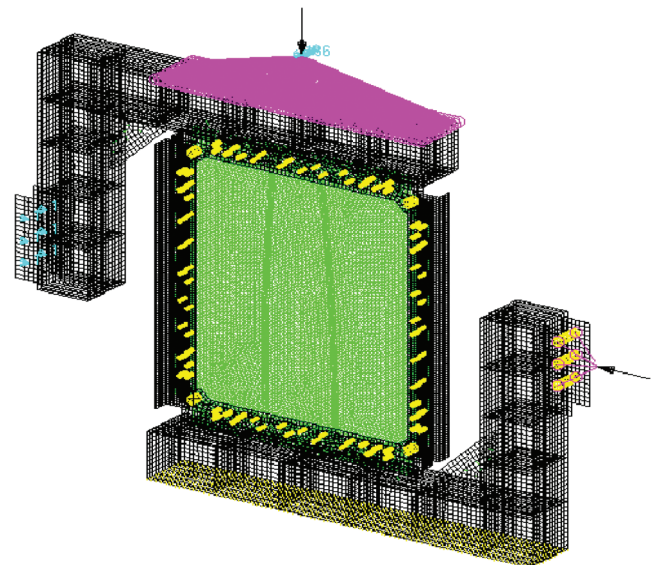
Nonlinear test fixture model developed of the combined compression-shear test fixture at NASA Langley Research Center [16].
